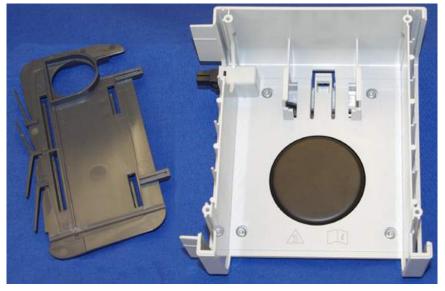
HUMIDIFIER BOTTOM HOUSING (HEATER PLATE SHOWN HERE, BUT IS NOT INCLUDED IN KIT)
